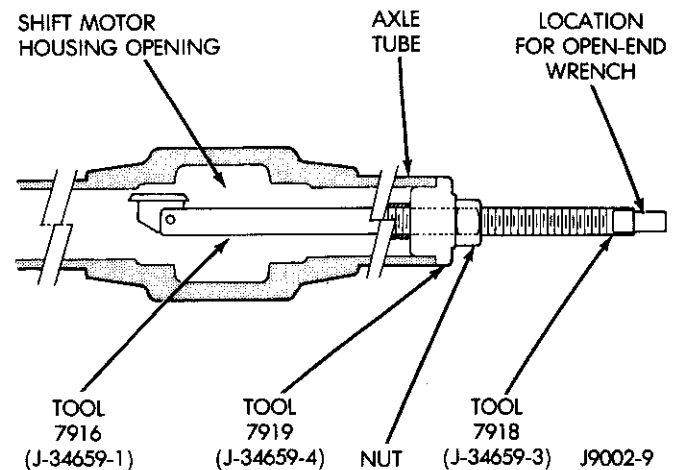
Axle Shaft Bushing Removal Tool Installed
